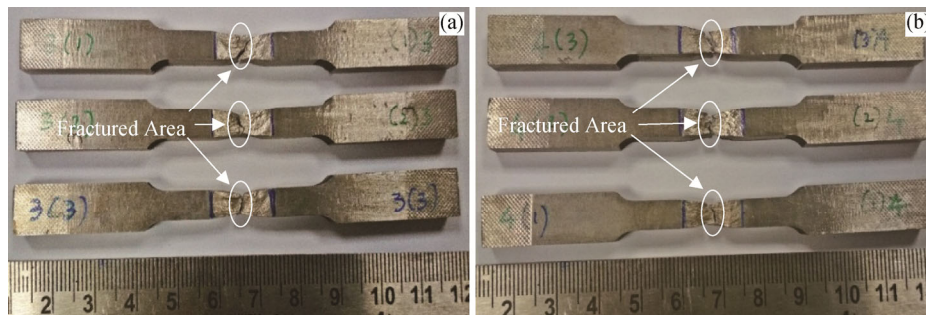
Photographs of tensile failure specimens of (a) GTA weldment and (b) PCGTA weldment produced using ERNiCr-3 filler wire.
